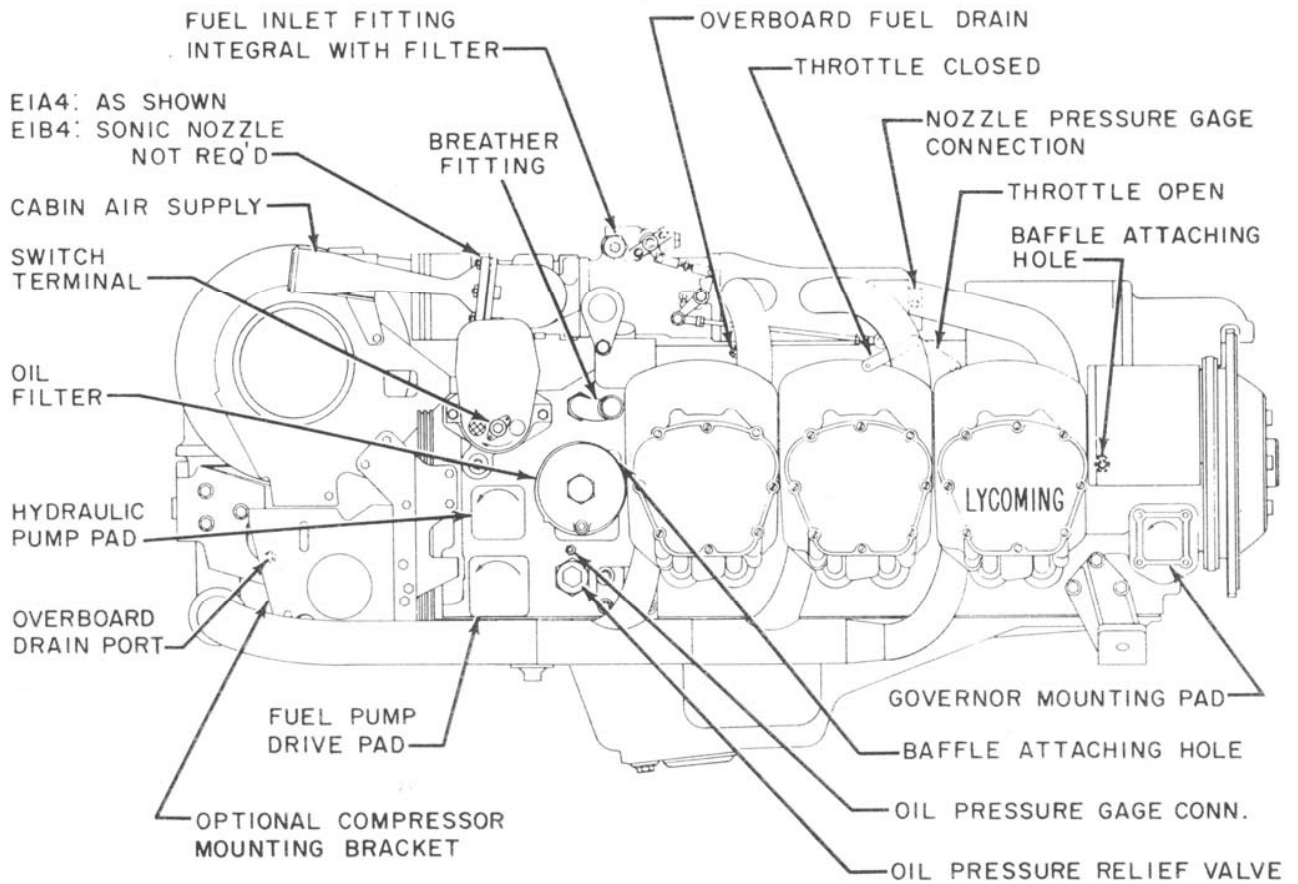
Installation Drawing – Right Side View – TIO-541-E Series
